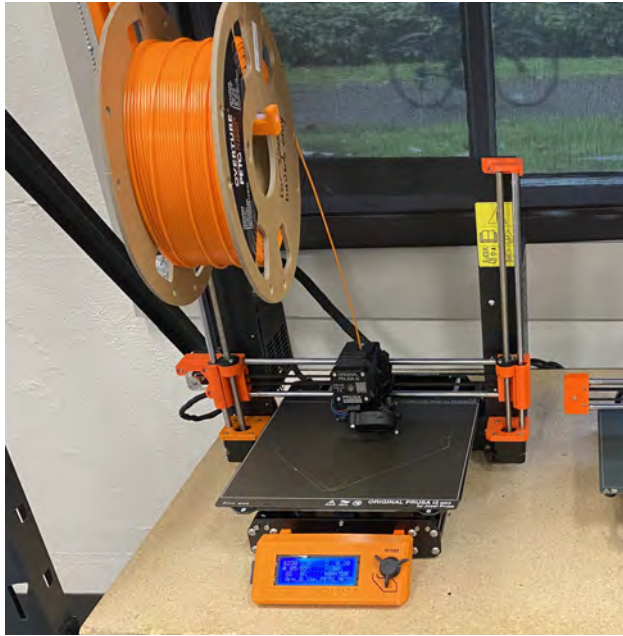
Prusa Mk3 i3 printer used to print tensile bars.
